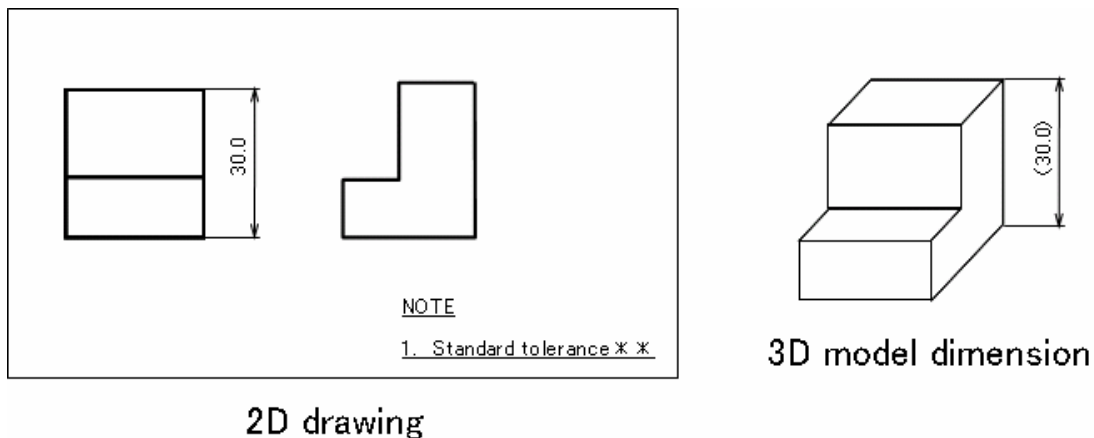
3D model created using median dimension value for standard tolerance
